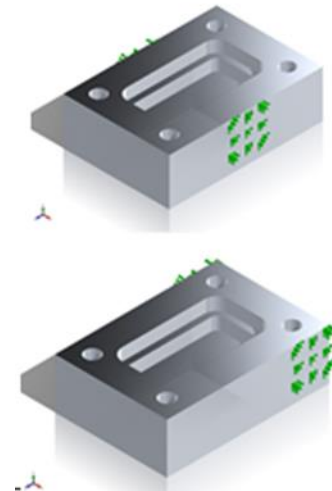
Illustration of the fixtured surfaces on the workpiece for length-centre and length-side fixturing setups
